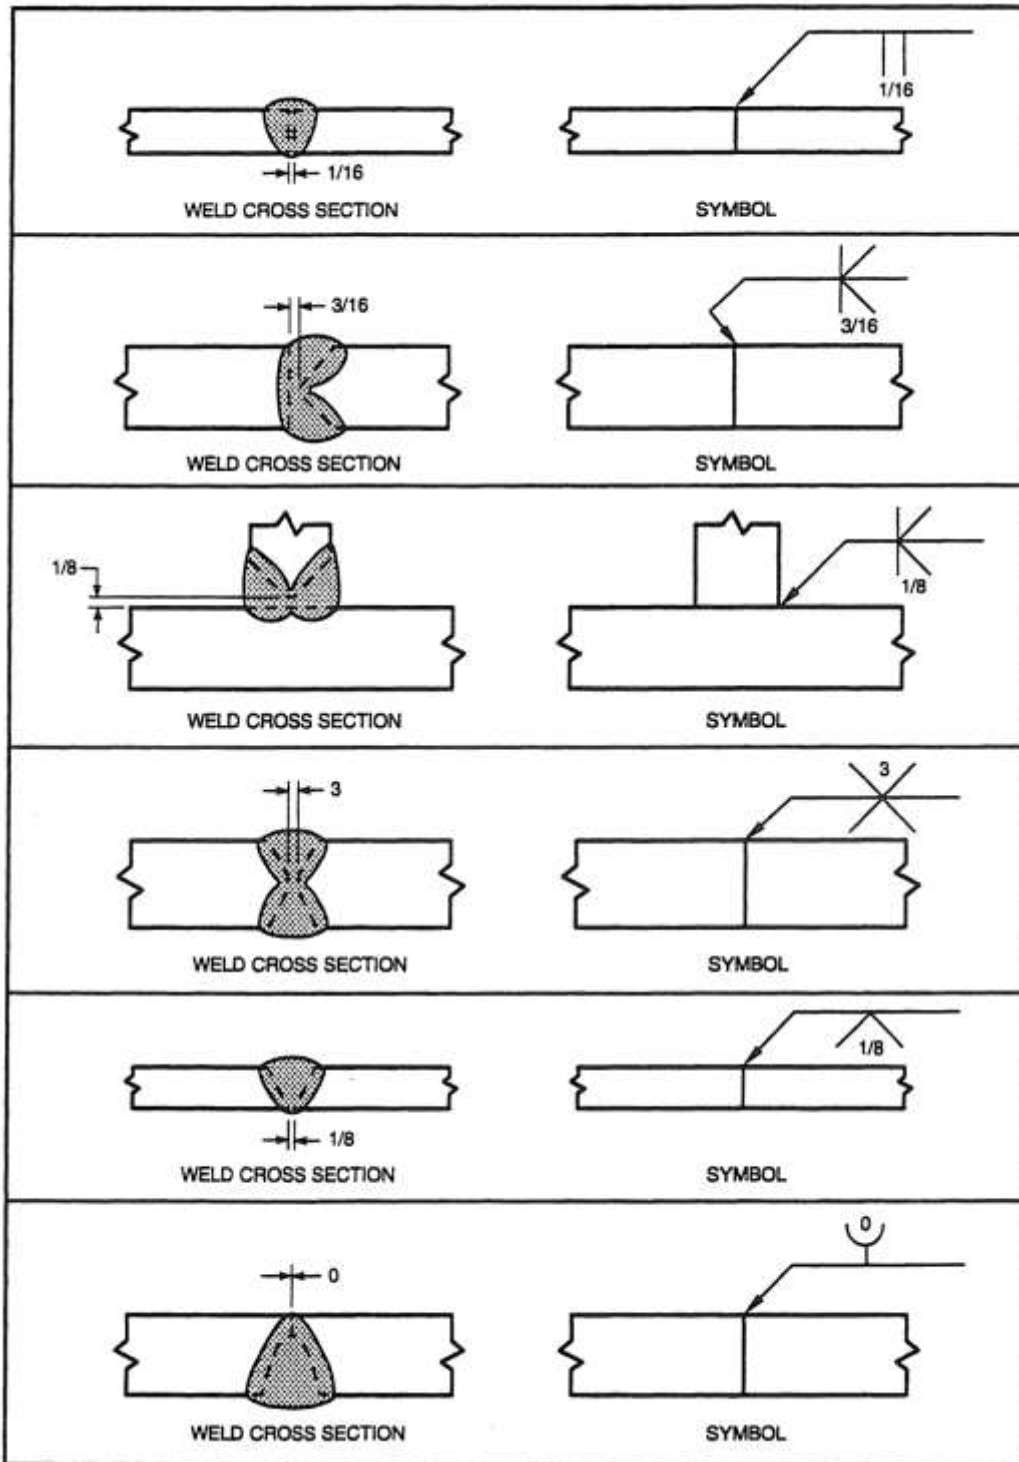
Various Types of Groove Welds with Corresponding Symbols
